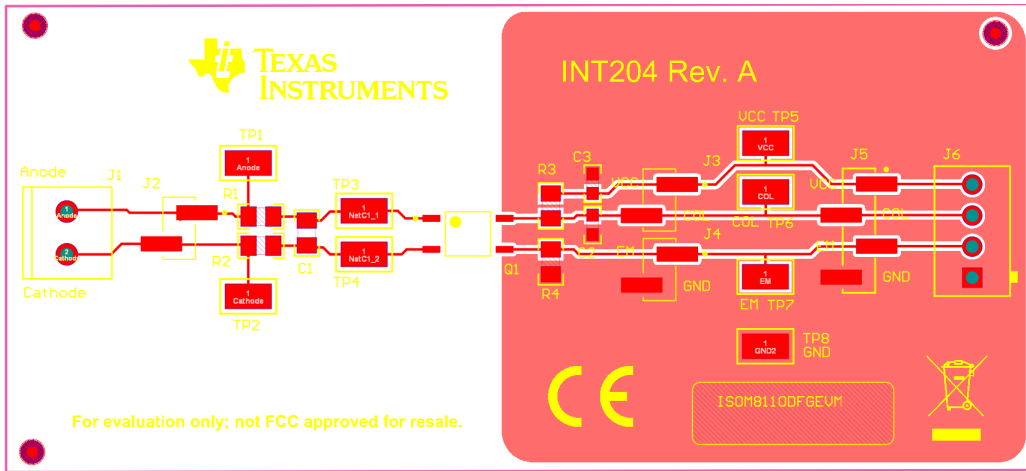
ISOM8110DFGEVM PCB Layout - Top
